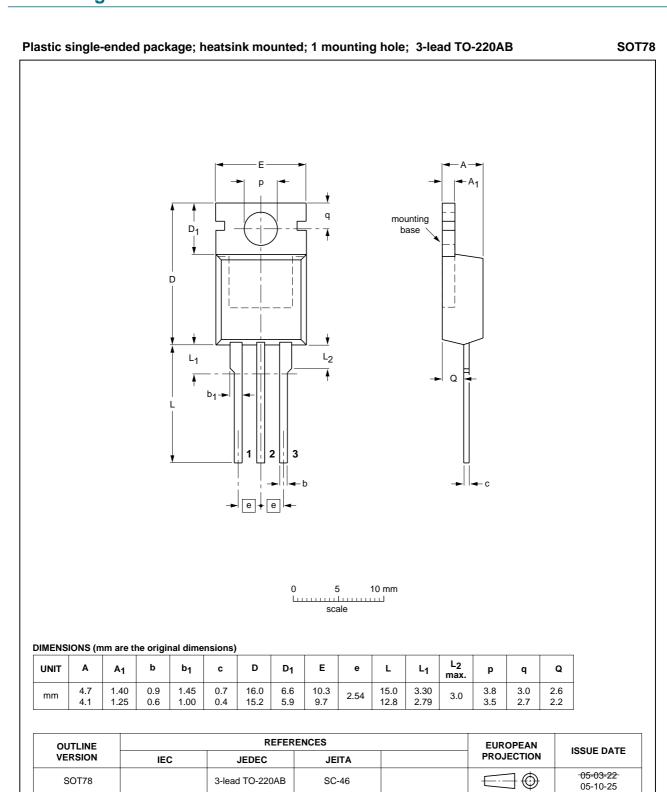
Package outline SOT78 (3-lead TO-220AB)
